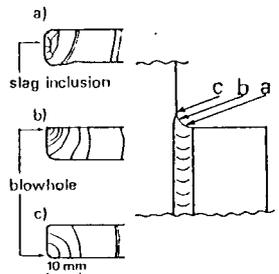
Fatigue Fracture Surfaces and Positions of Initial Cracks.
